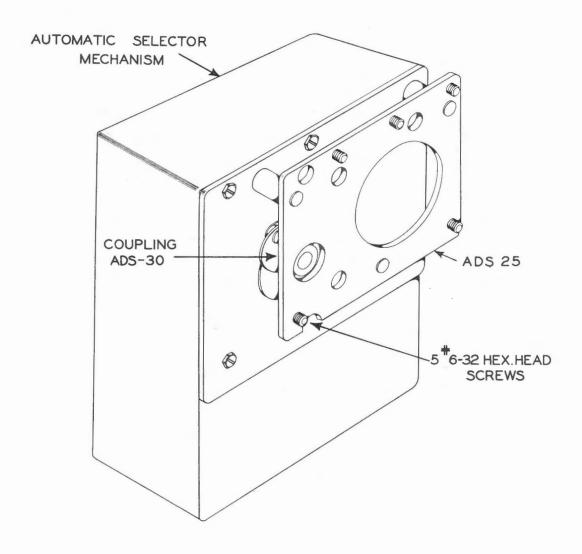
Rear View of Tuner Showing Adapter Mounting
